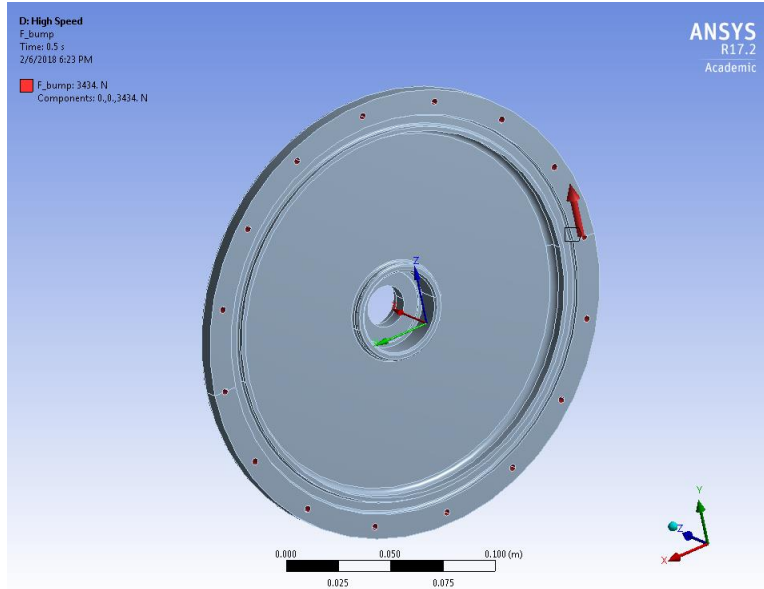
Bump loading - front endcap surfaces (rear endcap similar)
